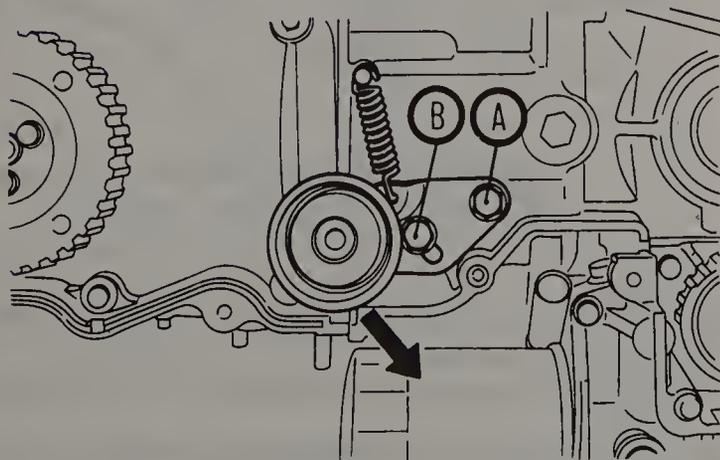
After attaching the spring, tighten bolt "a", then loosen it 1/2-turn (Sec 5)
